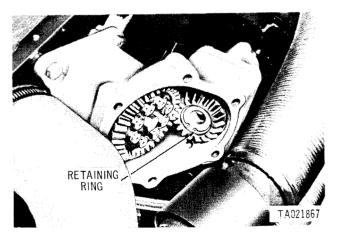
Removing or installing camshaft drive gearshaft plug retaining ring.
